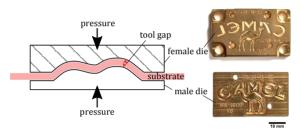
Schematic sectional view of a closed embossing tool with inserted substrate and an example of a conventional embossing tool made of brass
